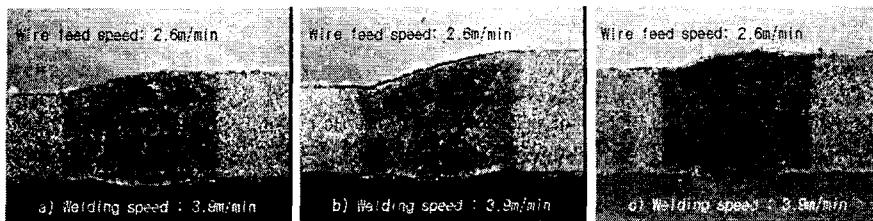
Butt weld cross section with $\Phi 0.8$ filler wire(feeding rate: 2.6m/min)
